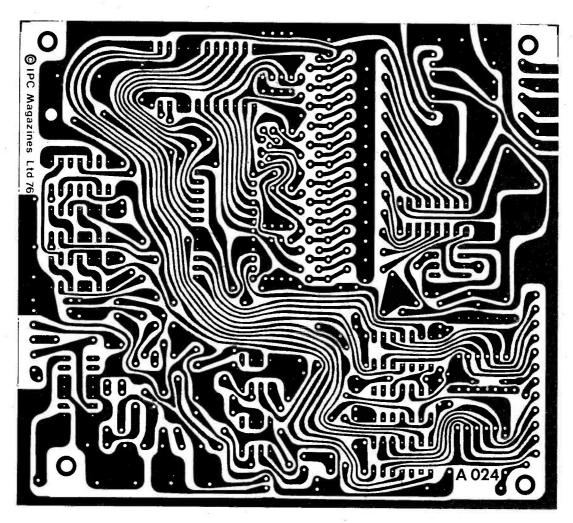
The printed wiring pattern for the main electronics board, drawn full size, which will be required irrespective of the motor used.
